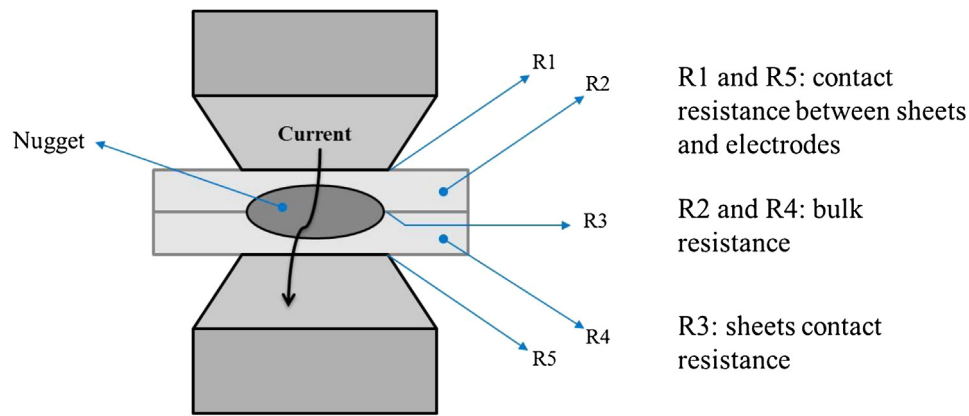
Schematic of resistance spot welding (RSW) process.
